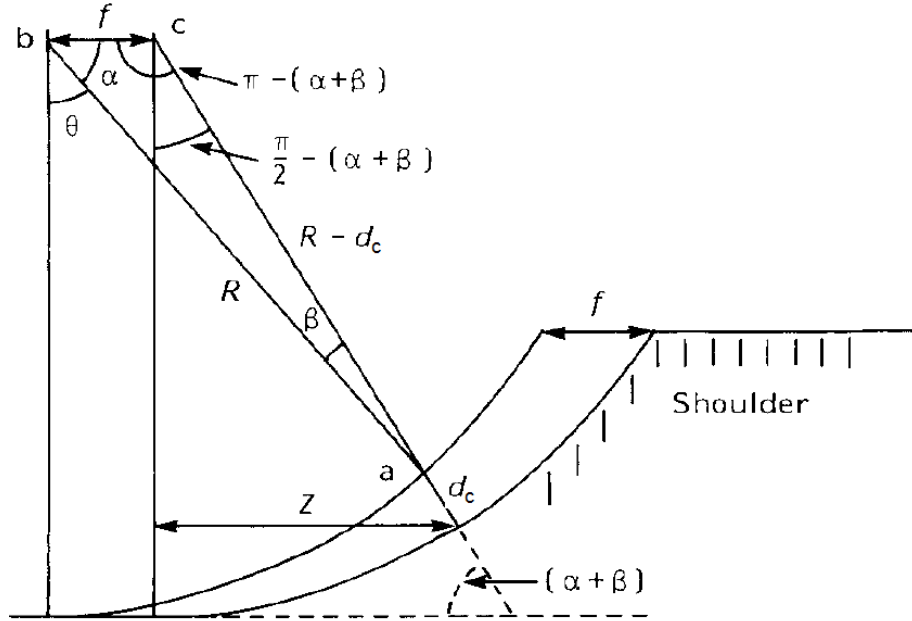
Tool-workpiece interface during SPDT with a round nose tool [23]
